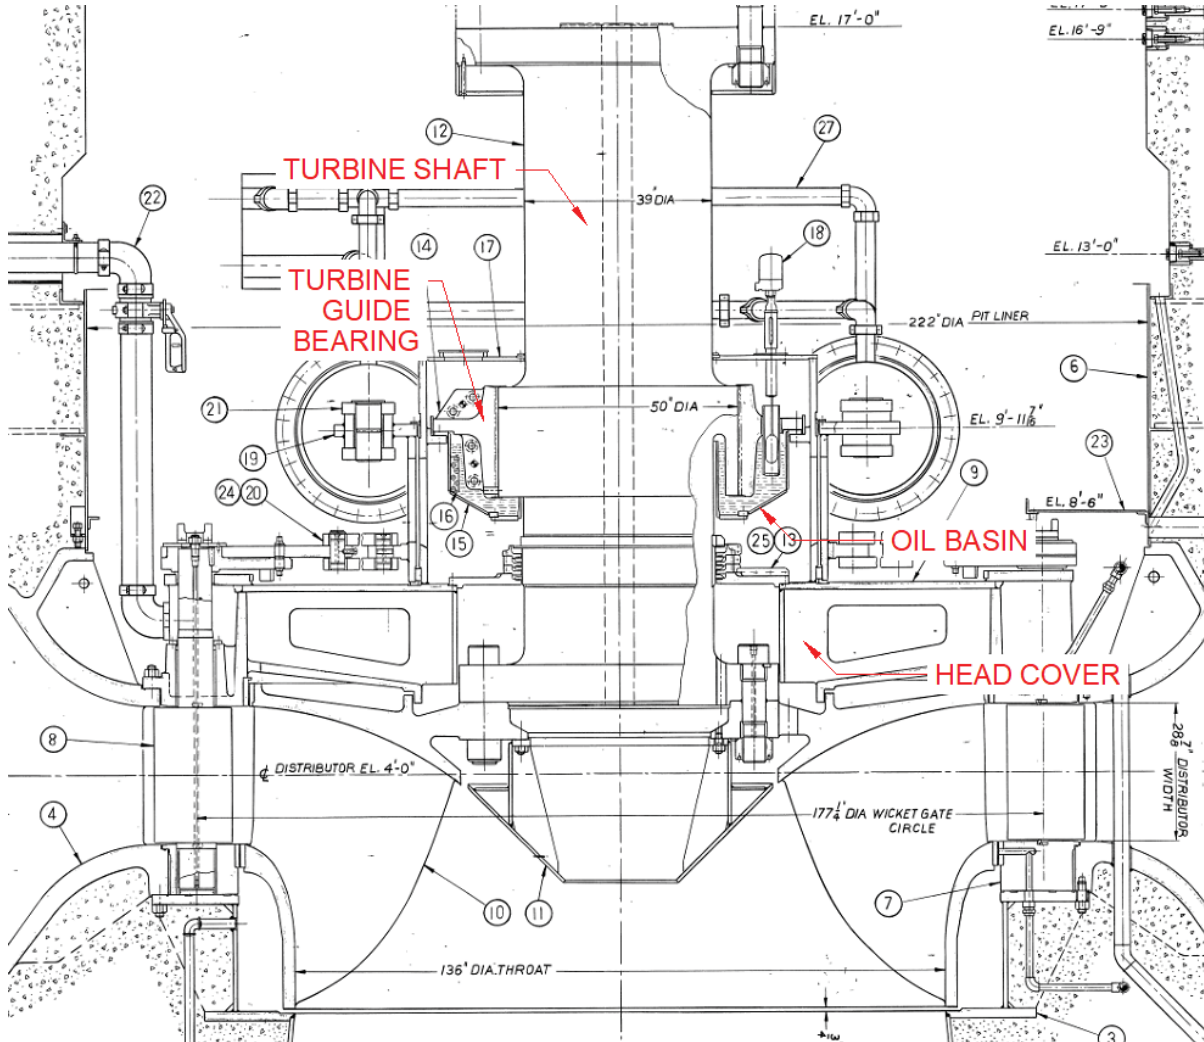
Turbine Guide Bearing, OEM Turbine Cross-Sectional View
